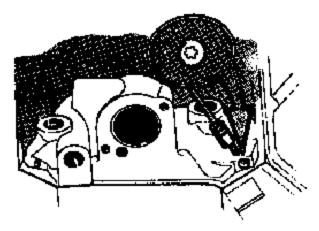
Torx Bolt Special Torx bolt (size T-45) located at front of manifold port flange requires special socket before stock intake manifold can be removed
